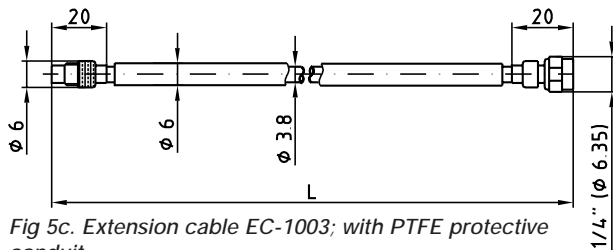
Extension cable EC-1003; with PTFE protective conduit
